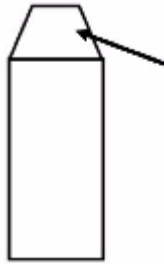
Apply Loctite 641 to the entire surface area of taper
